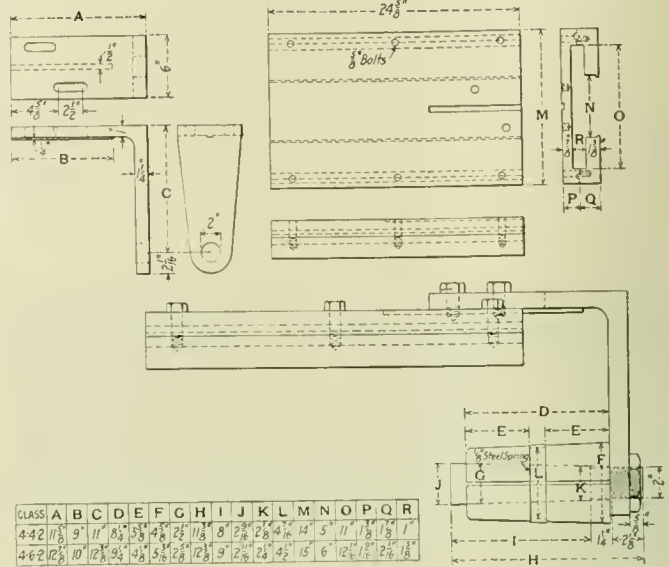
Fixture for Babbitting Suspended Type Crossheads
